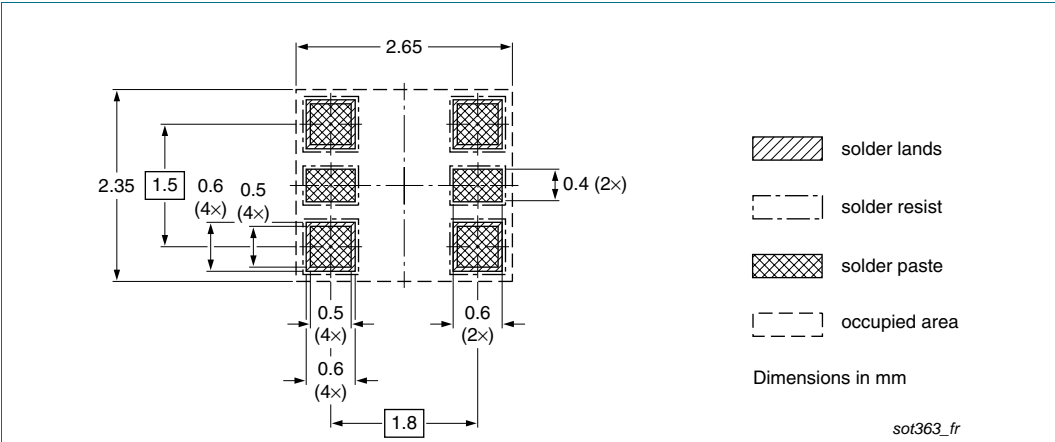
Reflow soldering footprint BAV99S (SOT363/SC-88)
